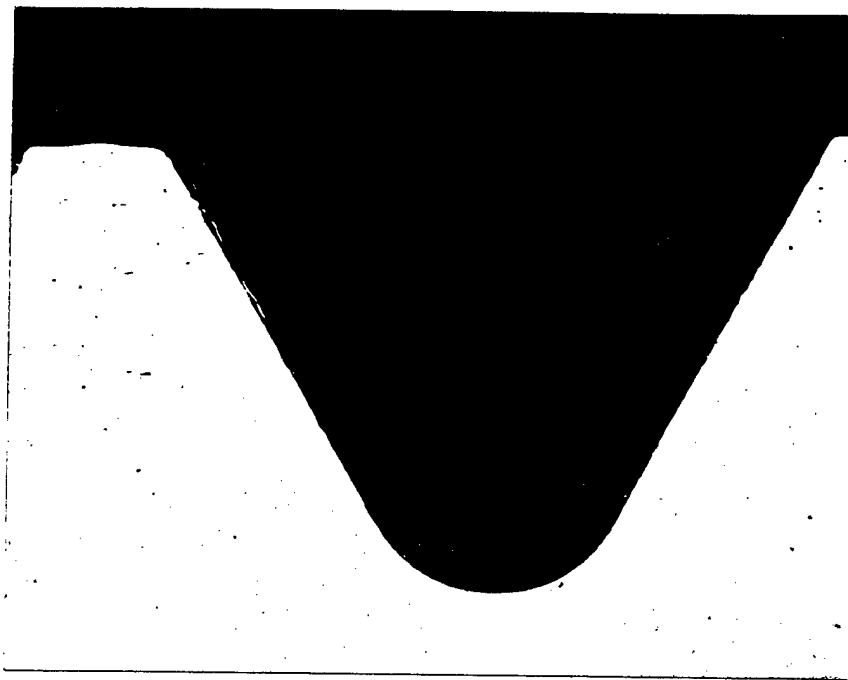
Cross Section of a Typical S&S Thread Showing a Smooth Profile (Mag. 50x).
